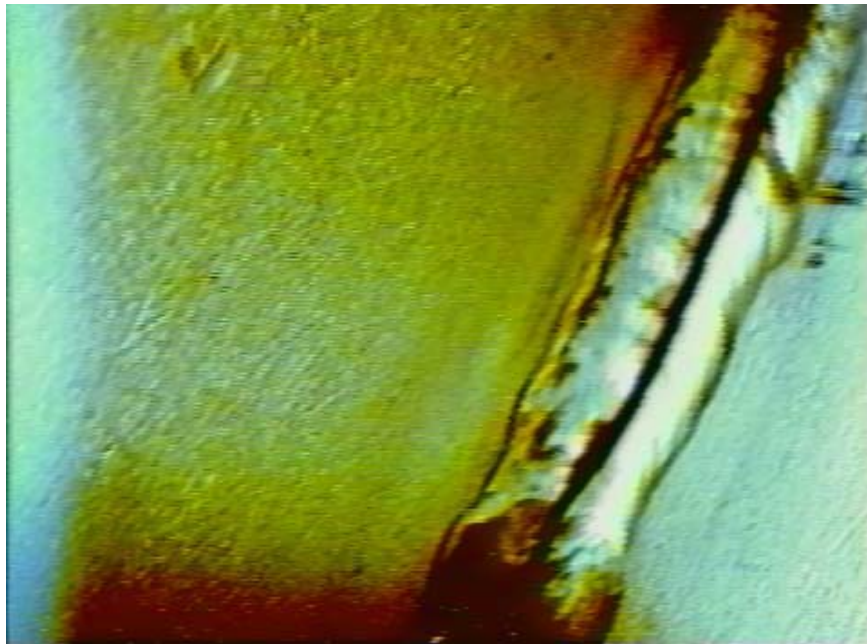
Bottom weld crack at location 11 identified in Figure B-19.
